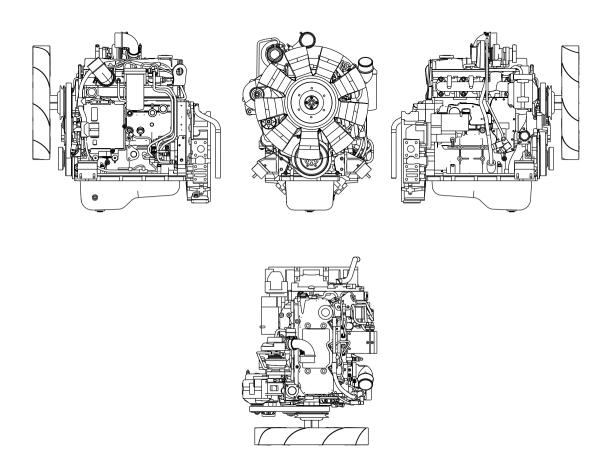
CUMMINS QSB4.5-C130 diesel engine
